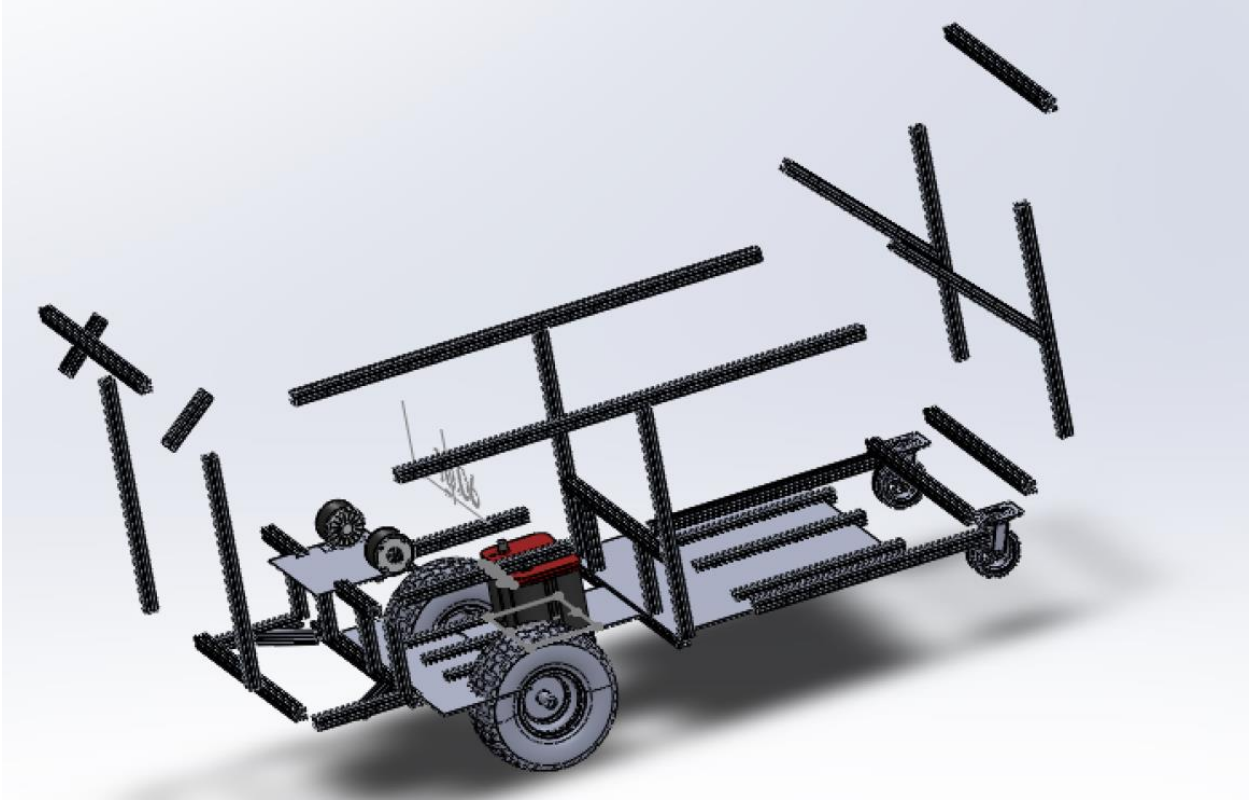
FRAME & CHASSIS EXPLODED VIEW
